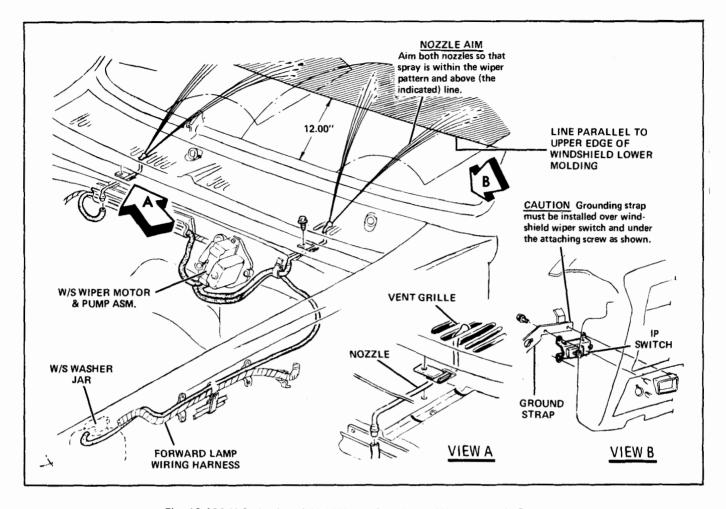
X Series Windshield Wiper Switch and Washer Nozzle Pattern
